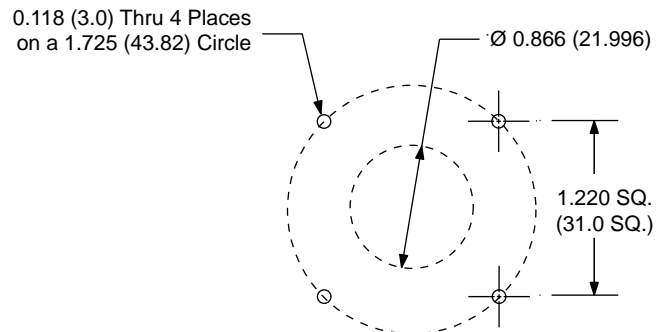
Mdrive linear actuator mounting and drill pattern
